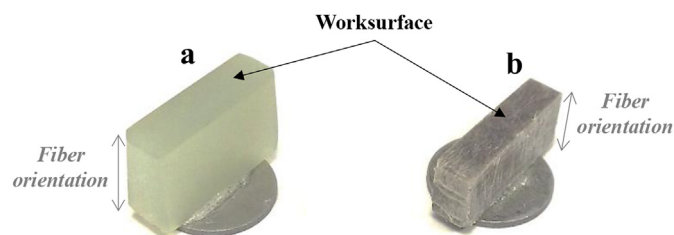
a) glass/epoxy workpiece. b) flax/PP workpiece.
